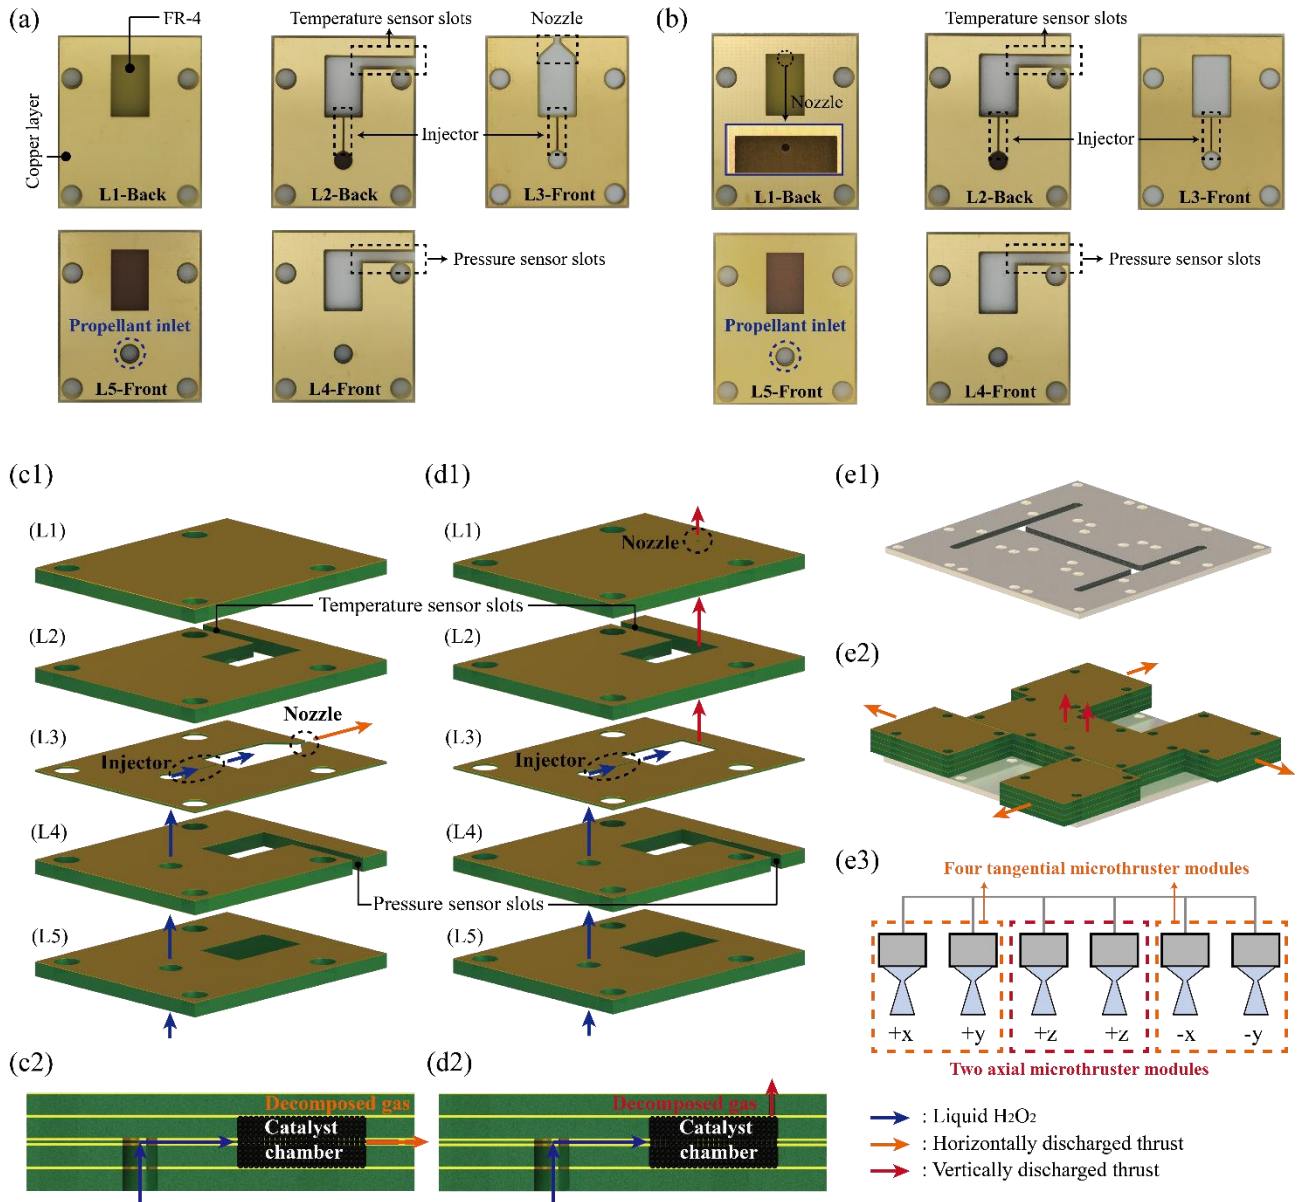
(a) Five-layered PCB plates for fabricating a horizontal-type monopropellant microthruster, (b) PCB plates for fabricating a vertical-type thruster, (c1) detailed schematic of a horizontal-type thruster, (c2) operating process of the thruster from the propellant input (blue arrows) to the decomposed gas release (orange arrows), (d1) detailed schematic of the vertical-type thruster, (d2) operating process of the thruster from the propellant input (blue arrows) to the decomposed gas release (red arrows), (e1) thruster module layout board, (e2) one example of the modular thruster assembly, and (e3) schematic of the propulsion system.
